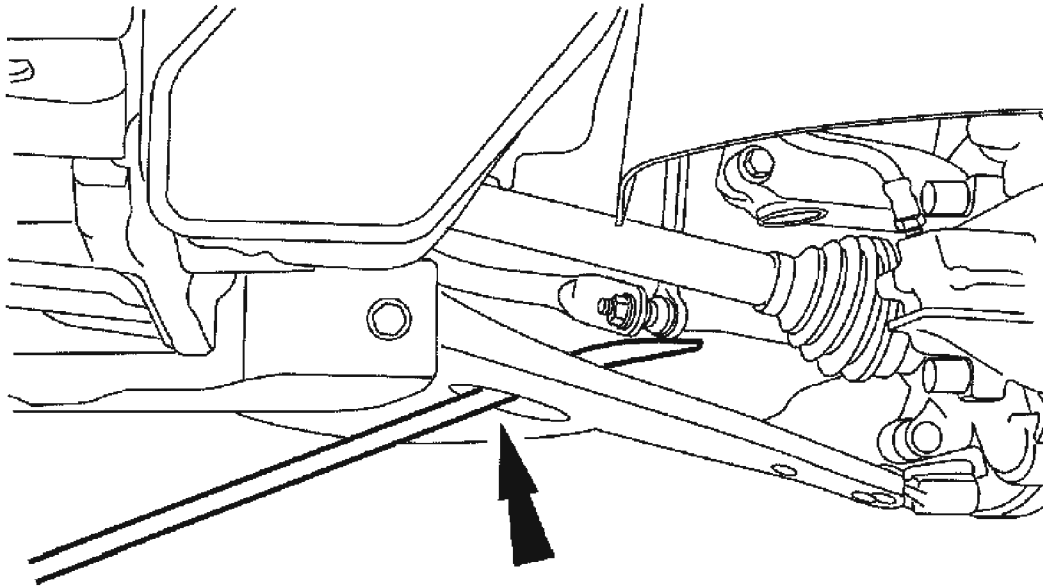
Removing Lower Arm Ball Joint Nut And Bolt
